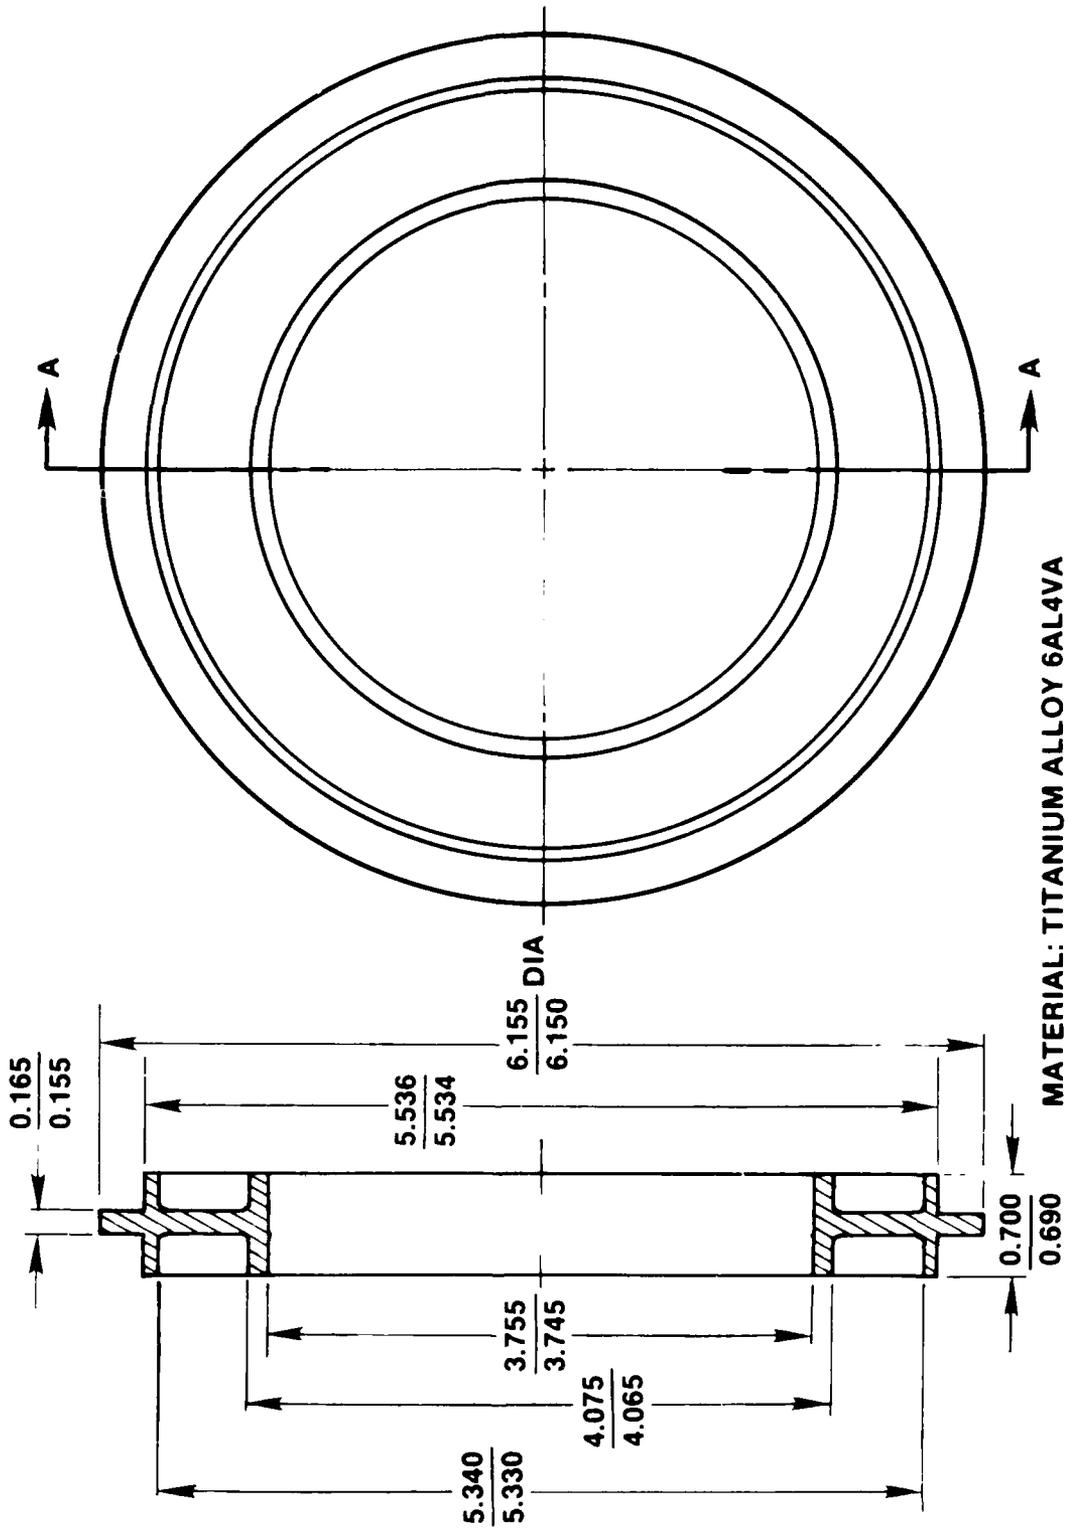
Joint ring C for Model 1 and Model 2 ceramic cylinders. The weight of joint ring C is 359 grams.
